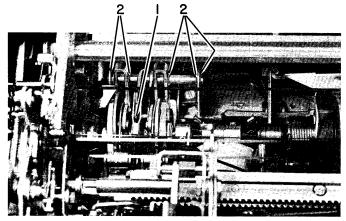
Operational Cam Check Pawl and Escapement Cam Follower Removal
